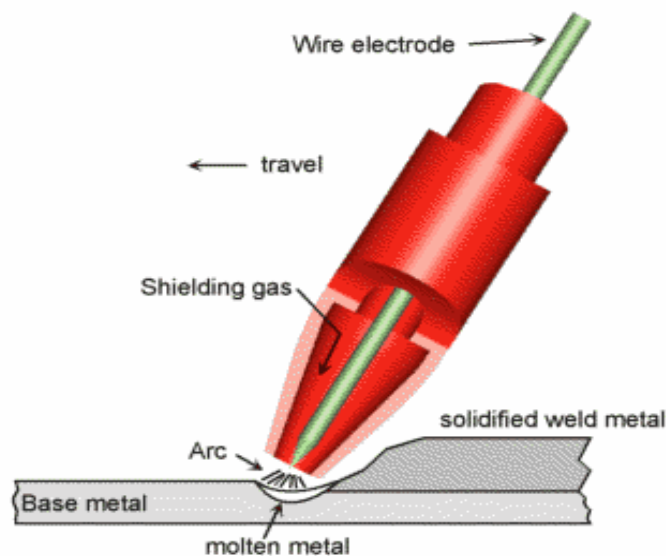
Principle of MAG welding (Designinsite online designer guide, 2012)
